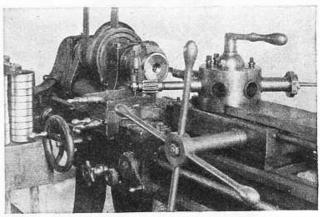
Manufacturing Steel Gear Blanks on an 18-inch Lathe
